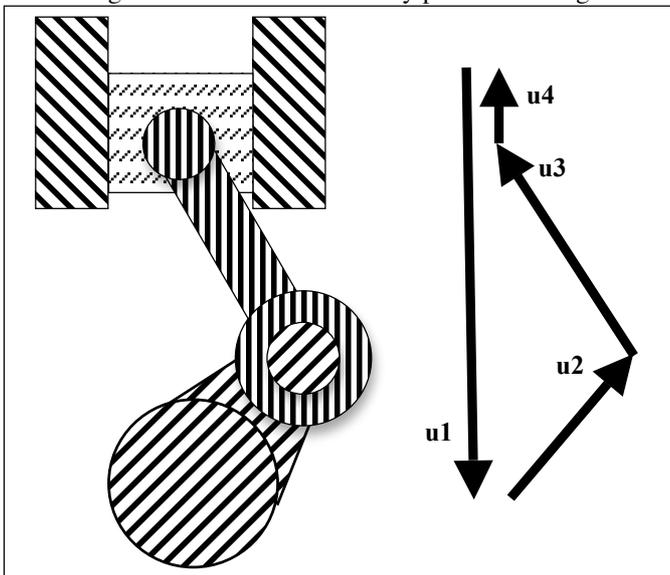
piston - connecting rod – crank shaft assembly and its vectorization.
